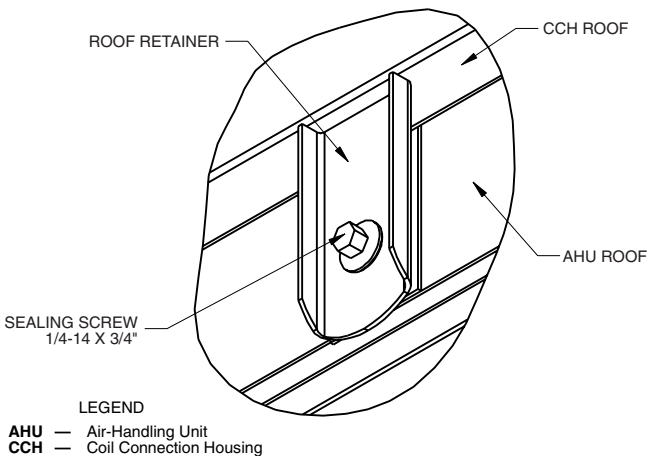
Secure the Coil Connection Roof to the Air Handler Roof
